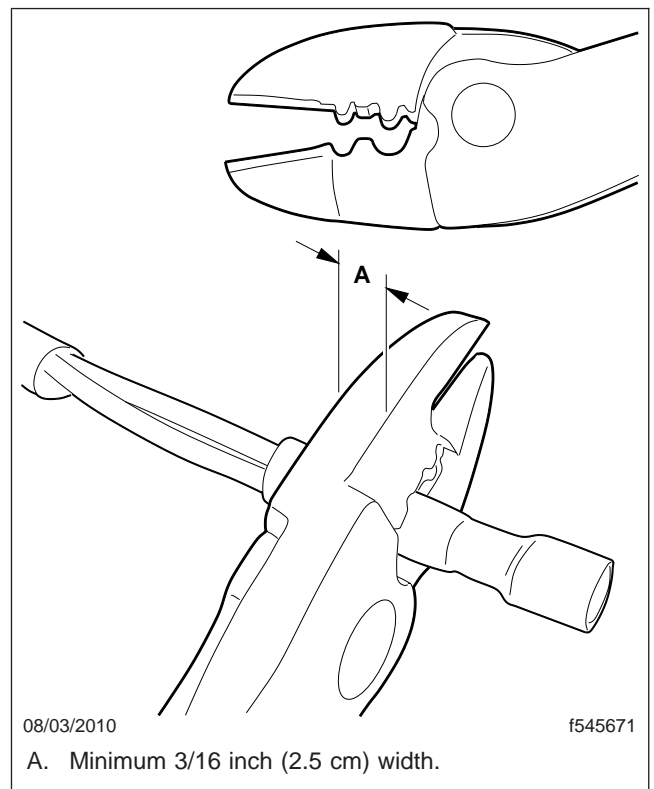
, Wrong Tool Being Used and a Crimp That Will Fail
